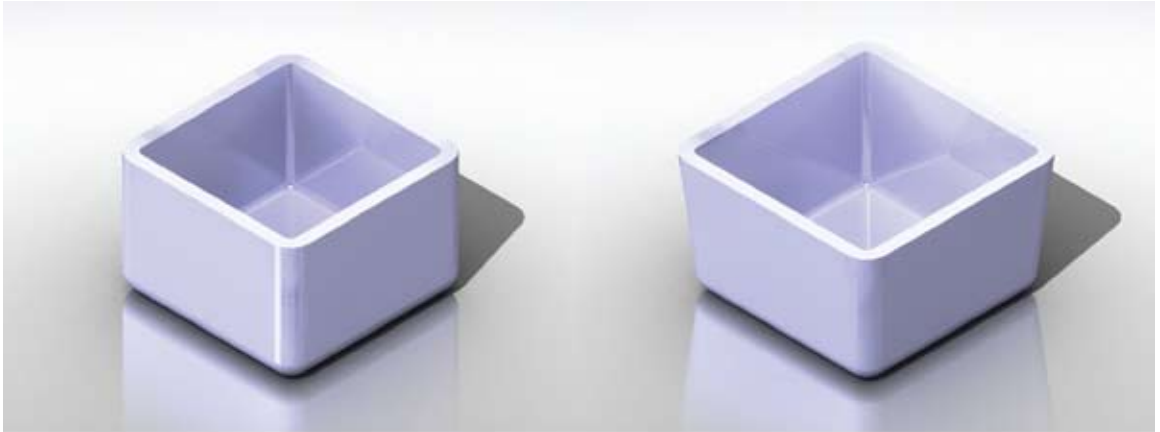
Example of an undrafted (left) and drafted (right) part design.
